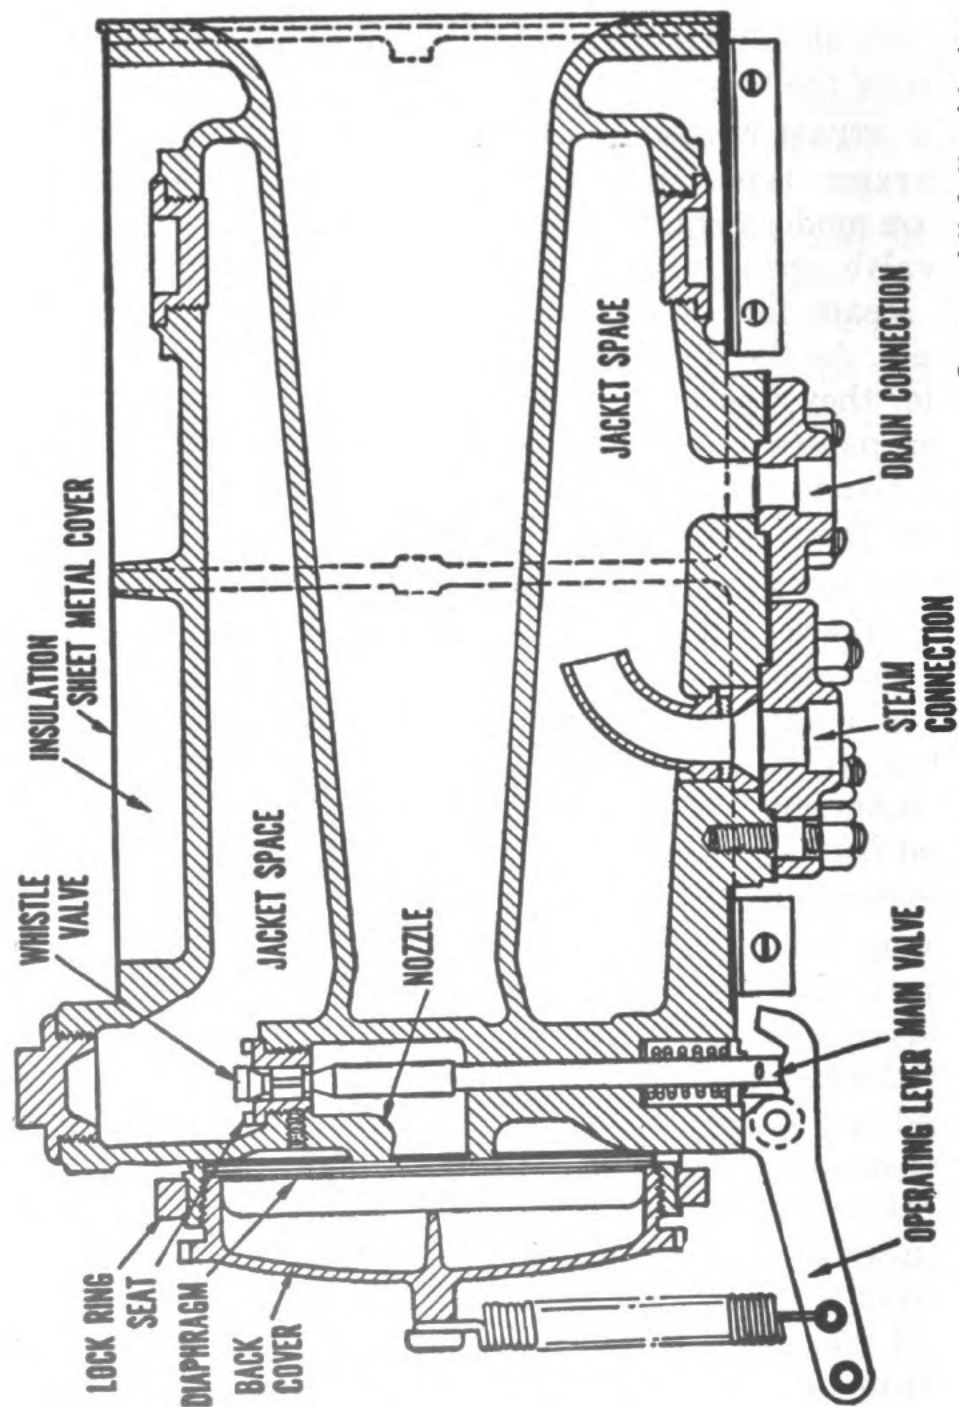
Sectional view of a typical steam whistle (diaphragm type)
